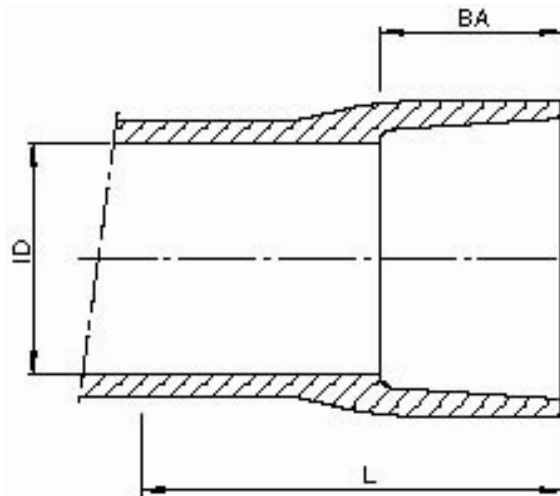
Minimum cutting length (L), socket length (BA) for TB
